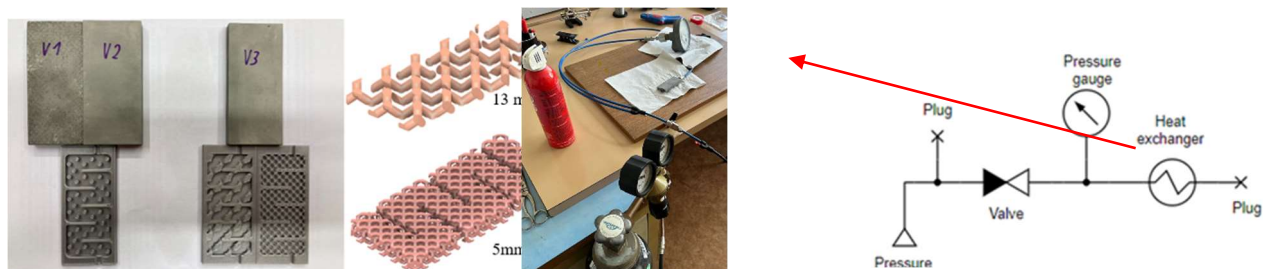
Overview of heat exchanger prototypes with inner structures details and leak test setup.
